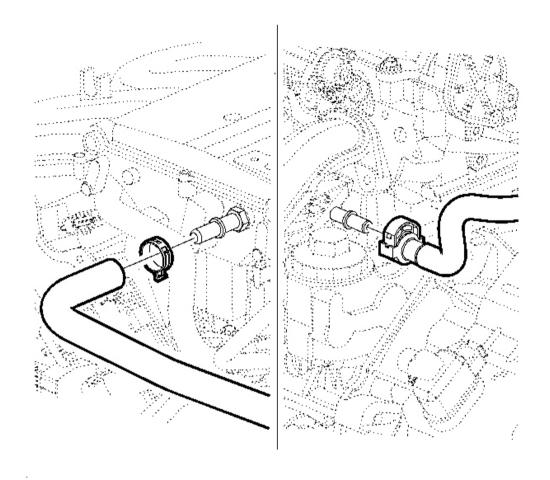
View Of Vacuum Brake Booster Check Valve & Hose Courtesy of GENERAL MOTORS CORP.
